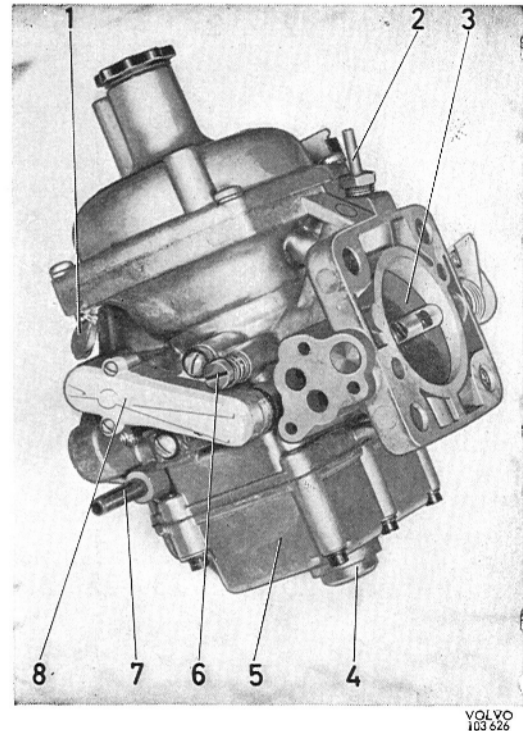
Stromberg carburetor, right side, B 20 A
